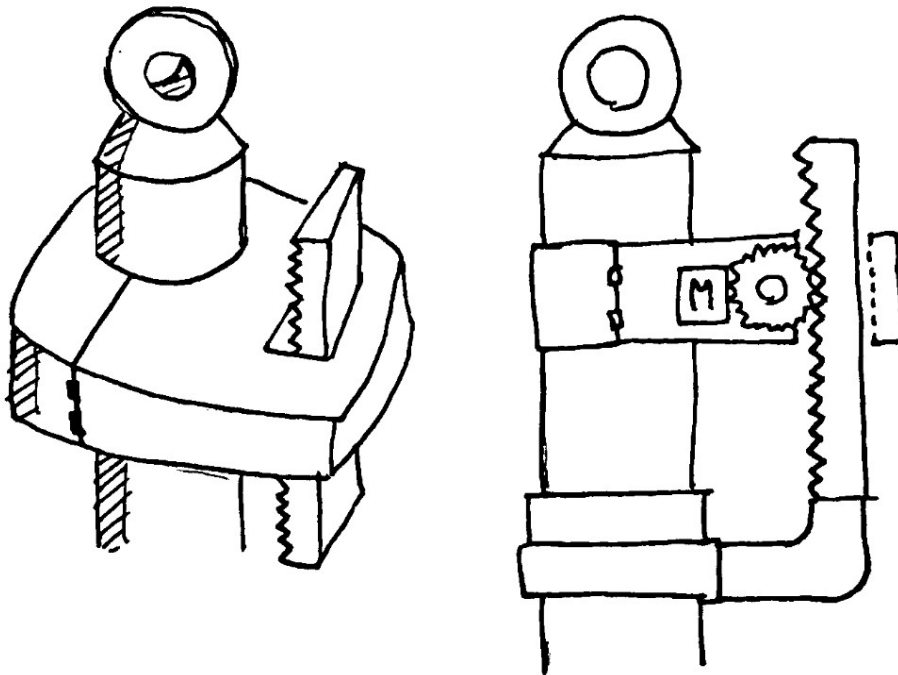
Drawings of concept 2. This concept is based on a splined shaft connected to the axle that can be driven to lift the truck's axle
